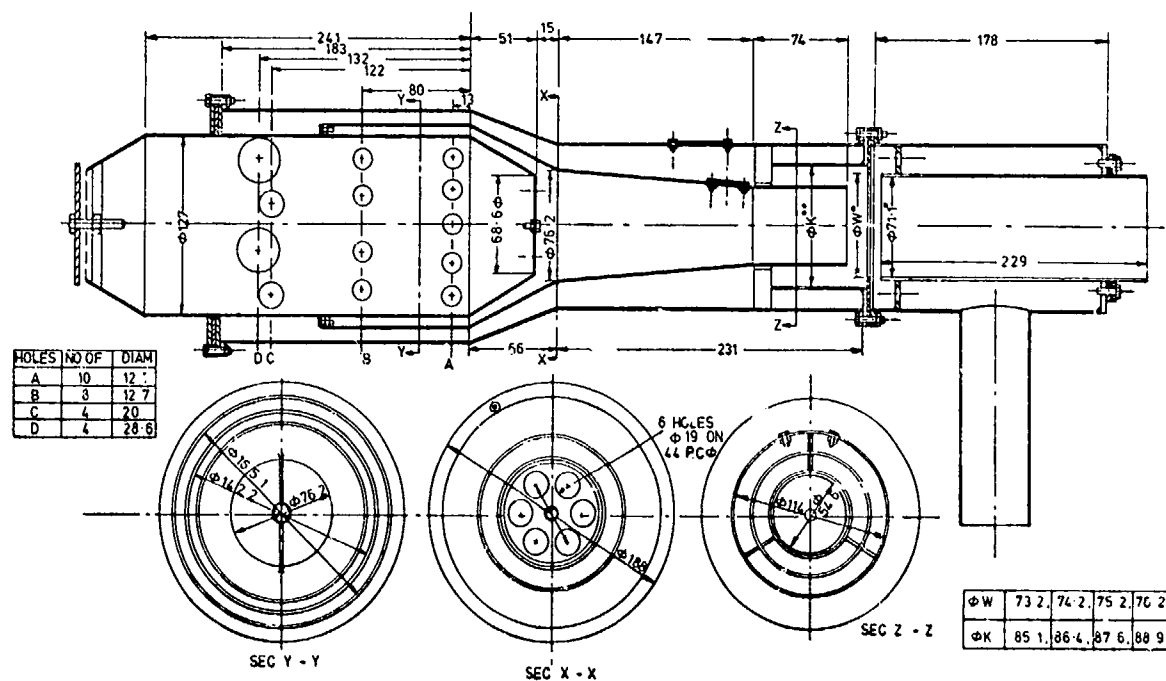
GENERAL ARRANGEMENT OF TEST COMBUSTOR [Dimensions in mm.]
